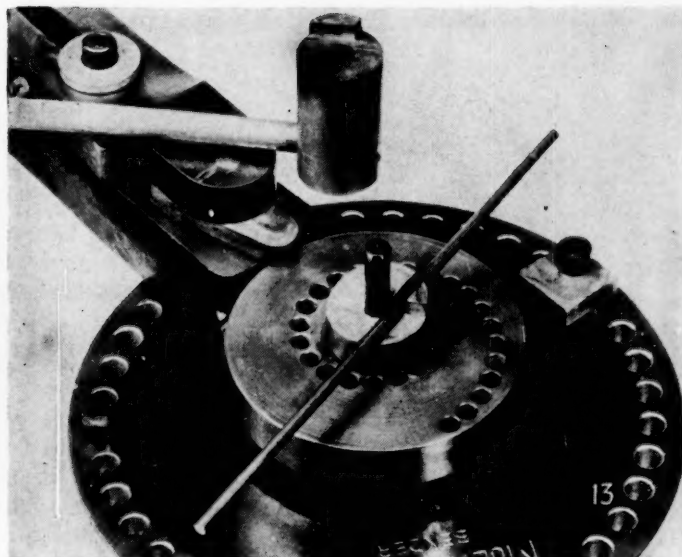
This shows setup for coiling a spring from a straight bar. Coiling tool is shown resting on arm of machine. By changing diameter and slope of mandrel, coil diameter and pitch can be made any value desired
